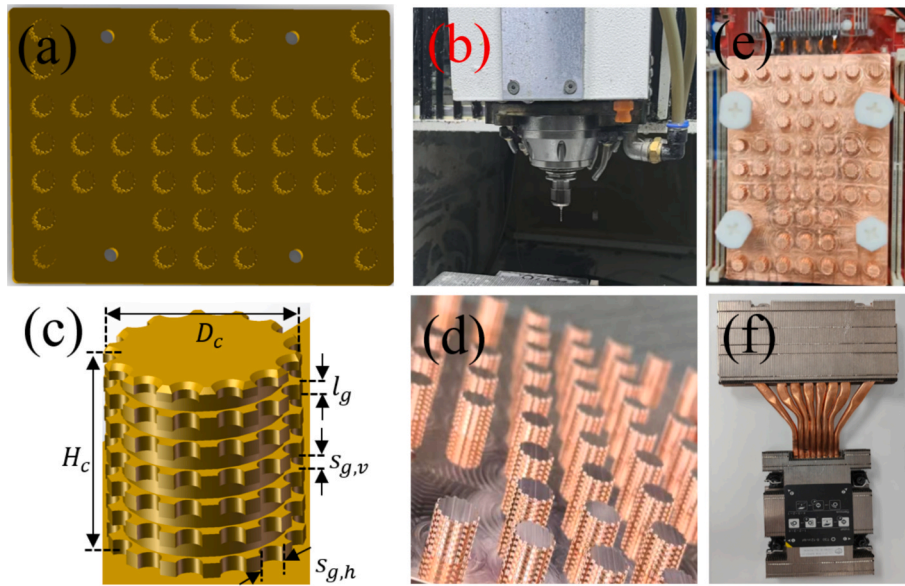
The design and fabrication of two-phase immersion heat sinks. (a) design drawing for the heat sink, (b) CNC machine tools utilized for mechanical processing equipment, (c) the diagram depicting the structural dimensions of a cylinder pin-fin and gears, (d) physical photographs of the heat sink along with local enlarged perspectives, (e) the baseline copper heat sink (HS) is vertically mounted on the PCB board, (f) the original heat sink was removed from the server.
